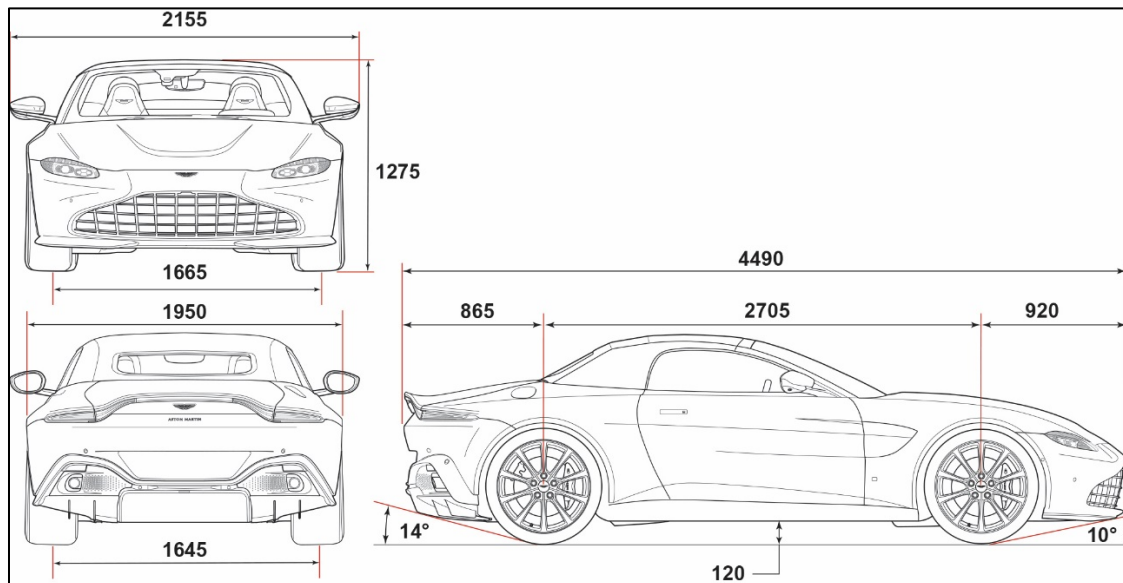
Roadster Exterior Dimensions shown with optional vaned front grill bumper (in millimetres)
